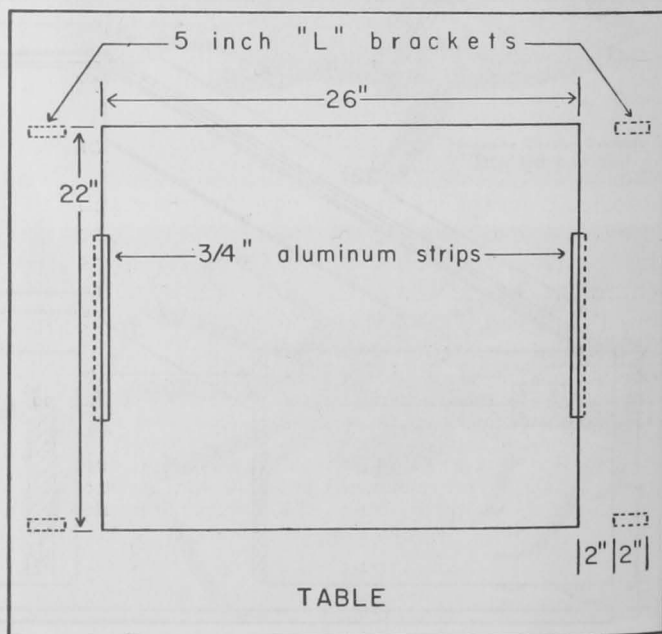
Drawing illustrating position of "L" brackets and aluminum strips.
